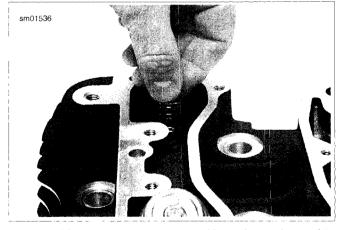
Valve Seal and Lower Valve Collar Assembly Installation
